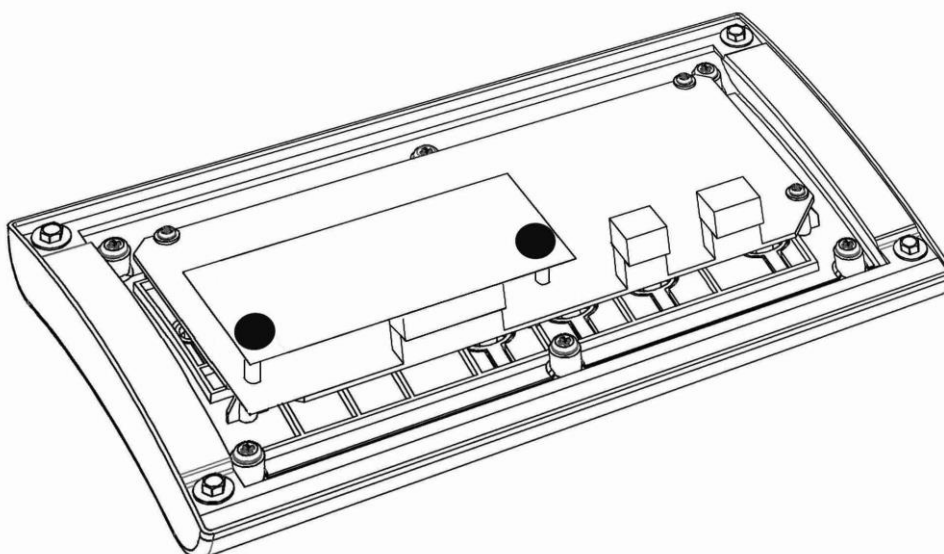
Sealing of FT-107S indicator with brittle stickers.
